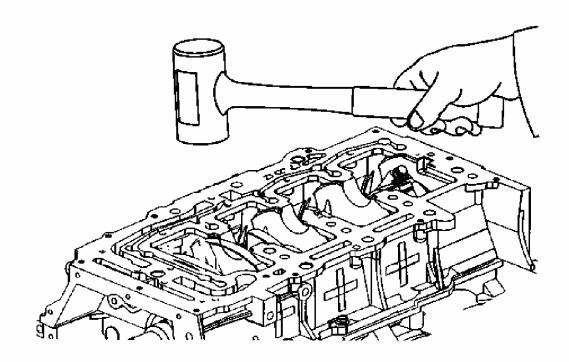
Tapping Lower Crankcase To Position Courtesy of GENERAL MOTORS CORP.
